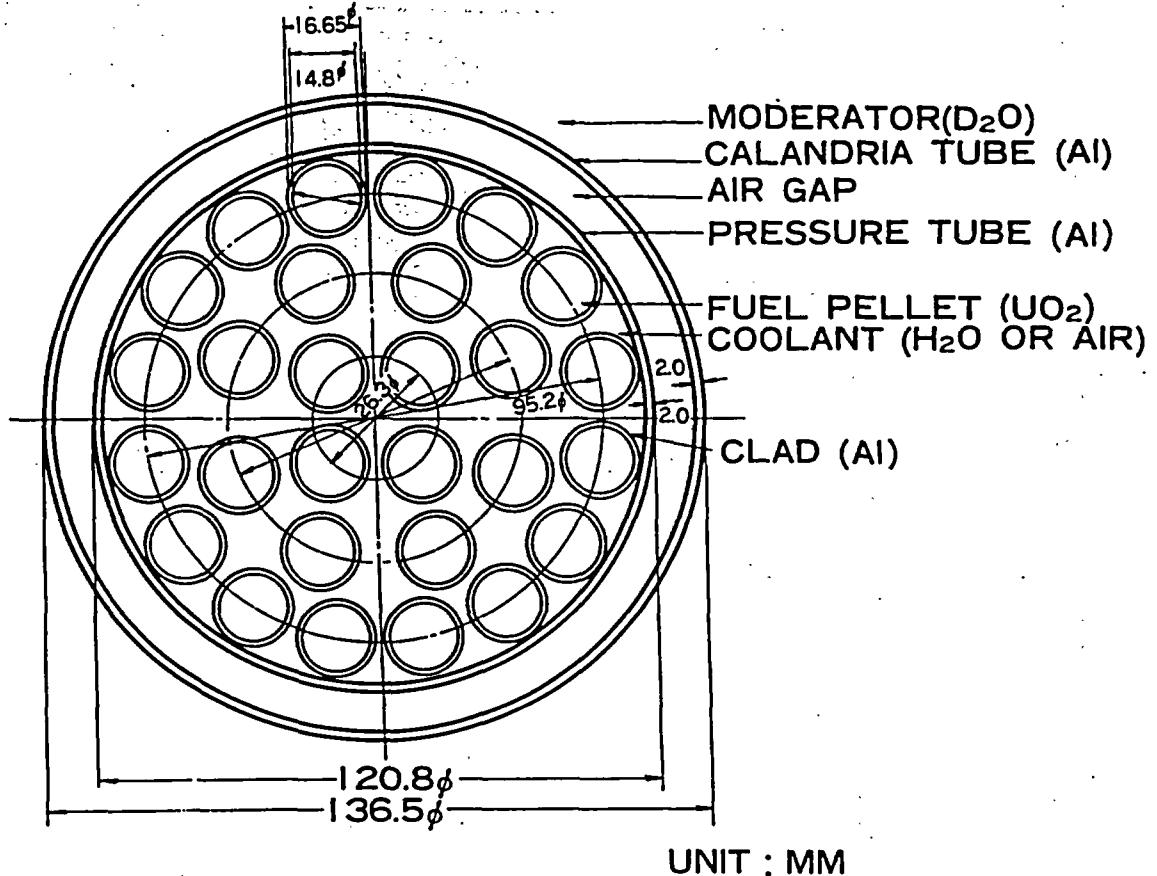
Cross Sectional View of 28-pin Driver Fuel Cluster
